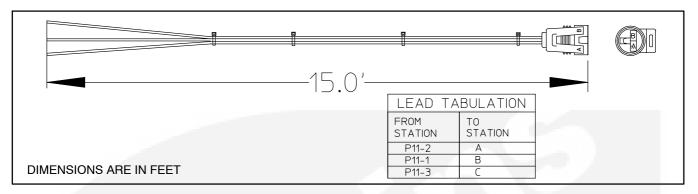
OIL PRESSURE SENSOR HARNESS
